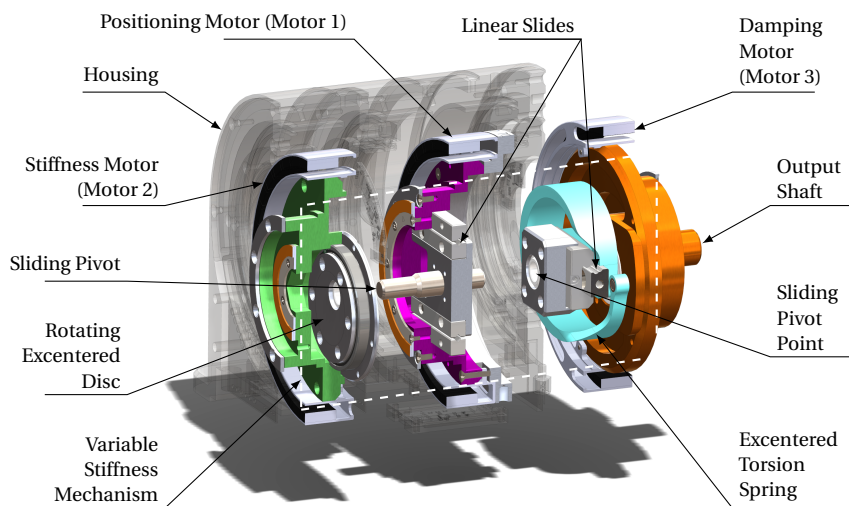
Exploded view of the Dyrac prototype CAD model. The stators of the motors are fixed to the housing (greyed out). The rotors of the motors all rotate around a common axis with the output shaft. The positioning motor turns the linear slide holding the sliding pivot, which carries the pivot point on the spring along when the pivot is out of the center. Depending on the pivot's position on the linear guide, the lever ratio for a force acting on the excentered torsion spring changes, thus changing the effective stiffness at the output shaft. The pivot position on the linear guide can be changed by rotating the stiffness motor relative to the positioning motor through the crankshaft mechanism formed by the rotating excentered disc. The damping motor sits on the output shaft implementing variable damping.
